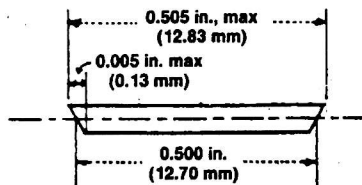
Tension Test Specimens for Sheet, Plate, and Molded Plastics
